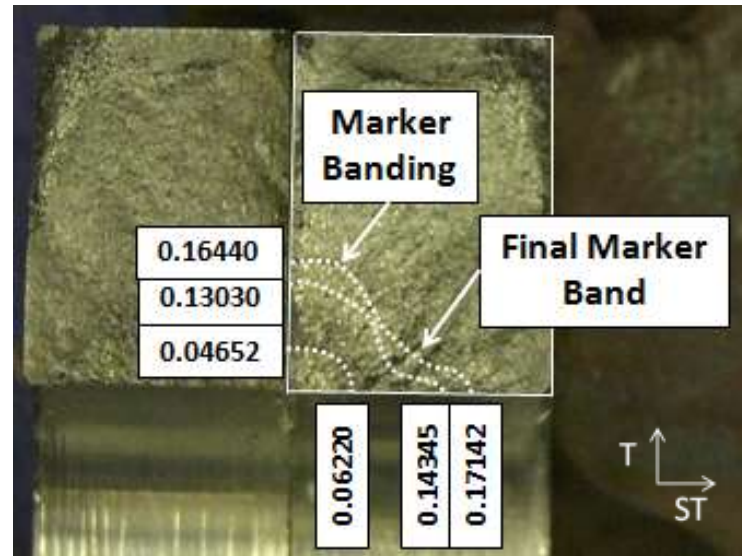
Marker Banding on Precracked Cold Expanded Specimen OFF-PC-CX2024-7
